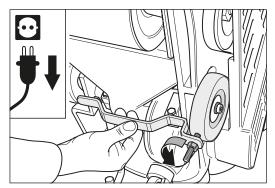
Take the actual position of the adjustable wheel using the setting fixture (right-hand wheel seen from below).
